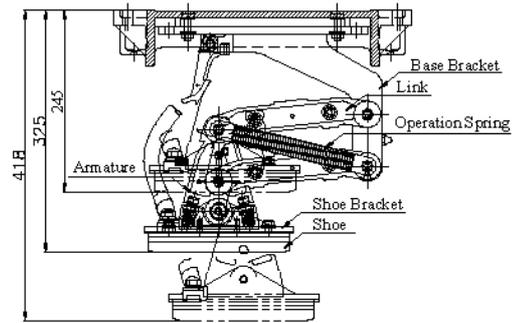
(b) Top view drawing of the power collector and operation range of shoe
